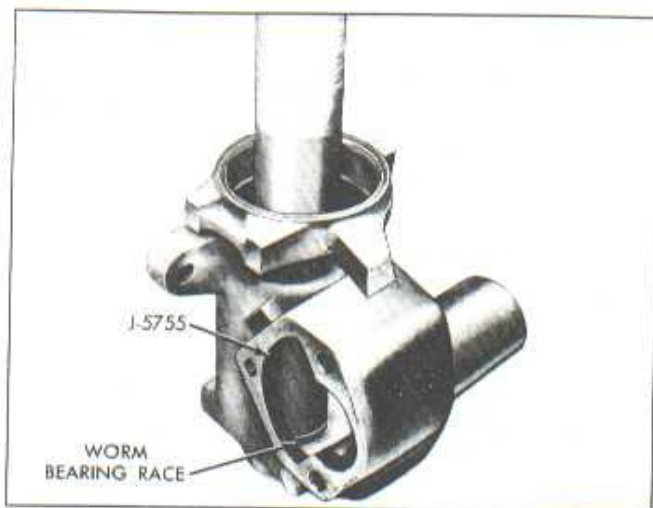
B-10--Installing Wormshaft Bearing Race-Typical
